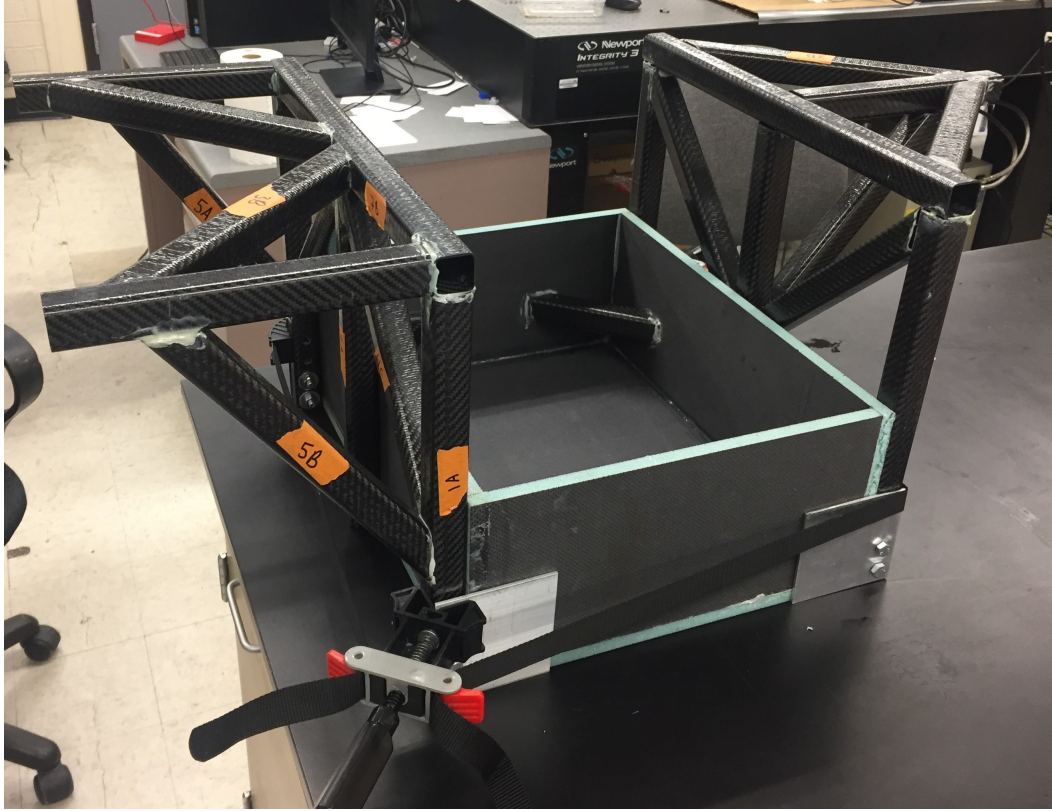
Carbon Fiber Shafts Attached to CFRP Box with Epoxy
